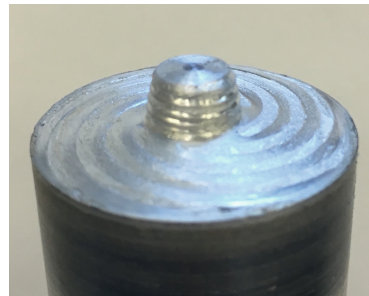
Convex tool with scrolls and threaded pin used in the FSE process
